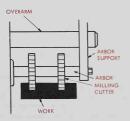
Gang milling---cutting two slots in a block of metal.
